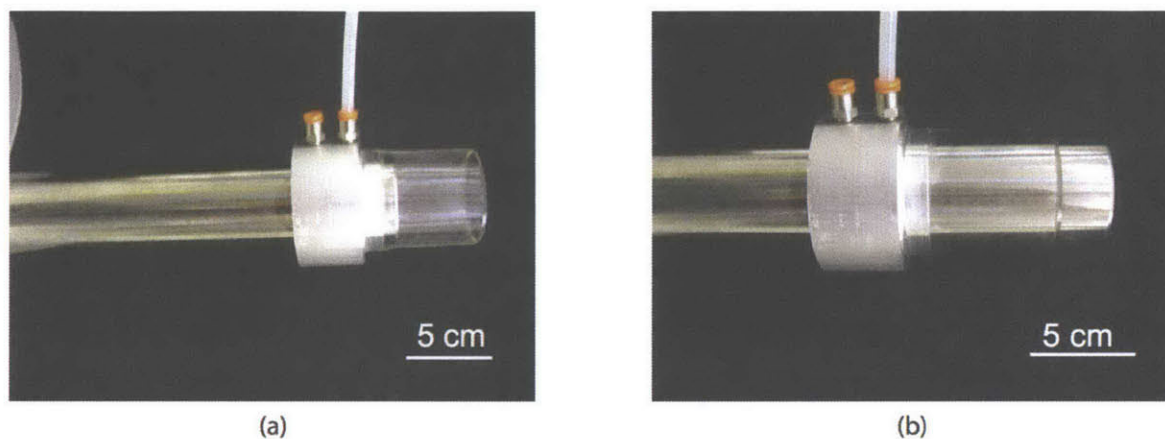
The air bushing designed by Petrzelka to enable mounting of cylindrical stamps on metal rolls [19]. Because of the high surface energy of PDMS, it is too sticky to slide over a metal roll without assistance. This device forms a thin air film cushion between the stamp and the roll, allowing the stamp to be easily slid into place. When the air supply is turned off, the air film collapses and the stamp evenly contracts onto the surface of the roll.
